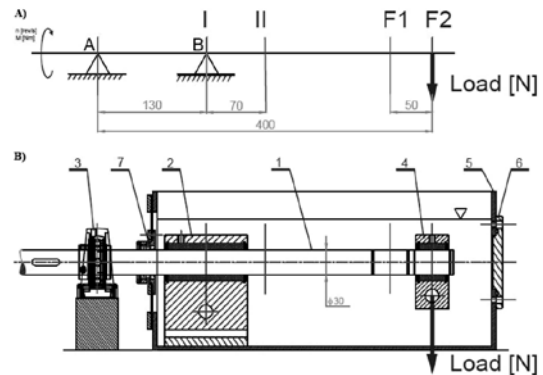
Test stand A) test stand diagram, B) test stand cross-section: 1 – shaft, 2 – tested bearing in self-adjusting support, 3 – rolling bearing, 4 – sliding bearing through which load is exerted, 5 – tank filled with water, 6 – cover, 7 – seal
